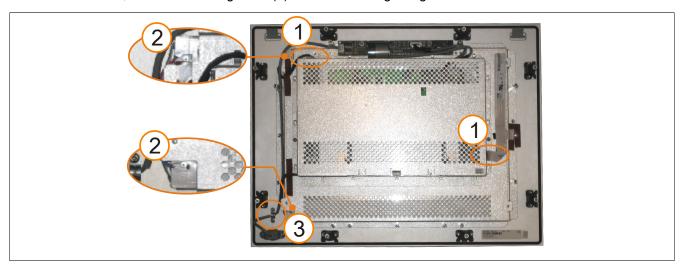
15" Automation Panels - Unscrewing and disconnecting
